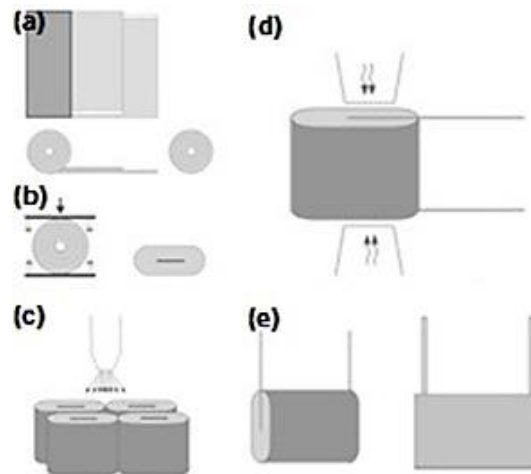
Five main stages in production of metallized film capacitors: a) Winding; b) Pressing; c) Metal spray; d) Welding or soldering; e) Final packing [17].
